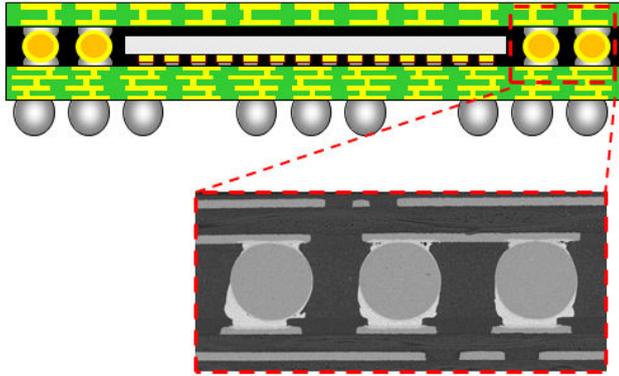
Cross-sectional view for I-PoP with Cu cored solder ball (CCSB) interconnections.
